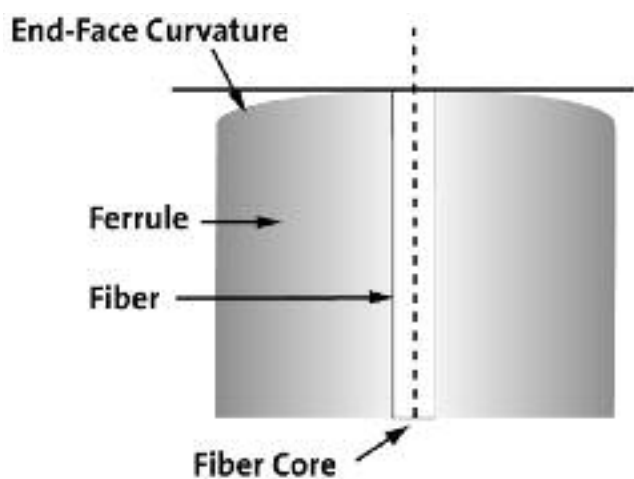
UPC Connector End-Face | Drawing ZA-3128
